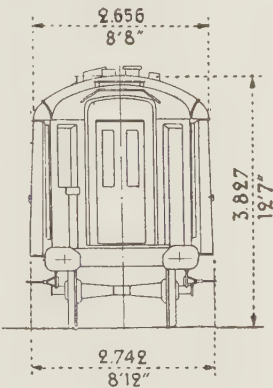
End view of sleeping-cars built by the *International Sleeping-Car Company* to suit the English gauge.
